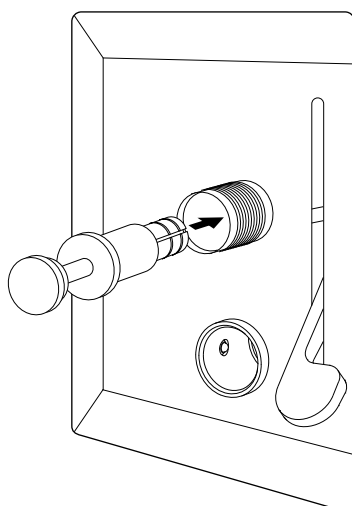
Inlet valve seal tool inserted in the inlet valve
